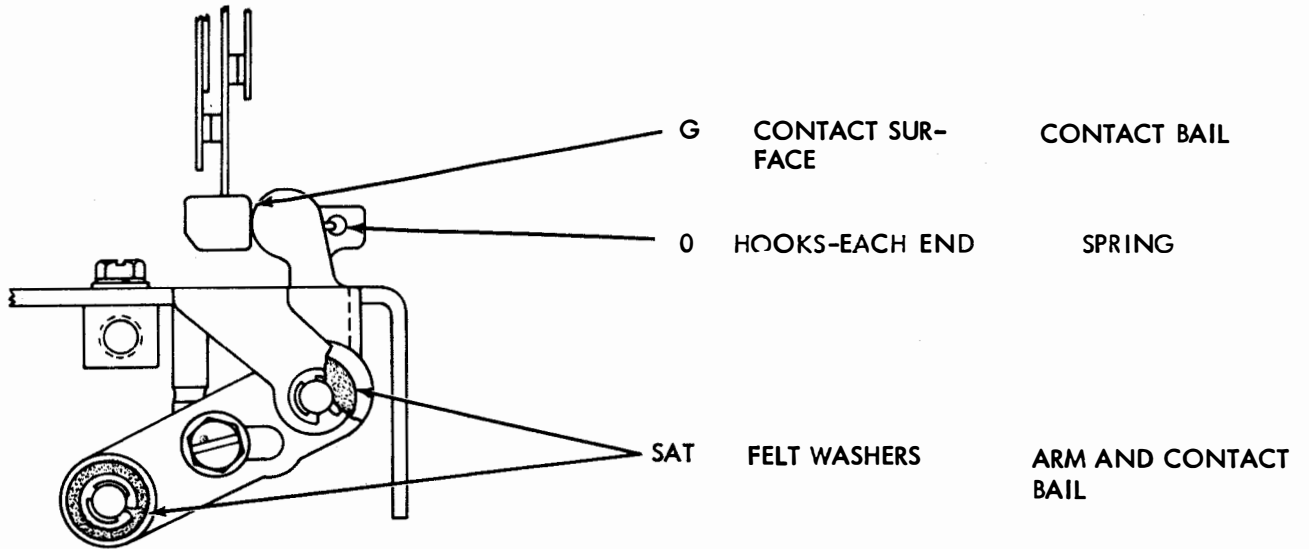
Single Auxiliary Timing Contacts Mechanism
